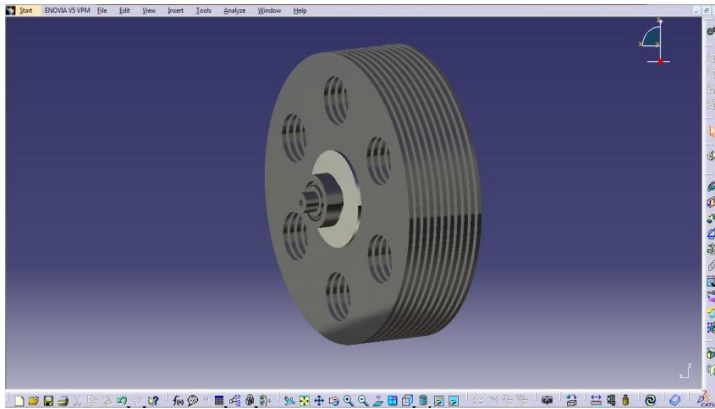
CATIA 3-D tesla turbine disc assembly
